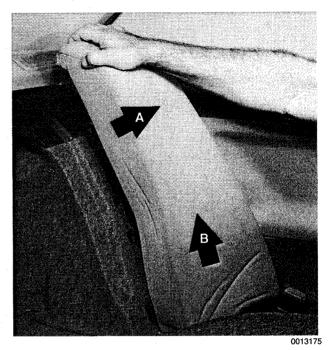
Remove backrest side section by lifting out (A) and up (B).
